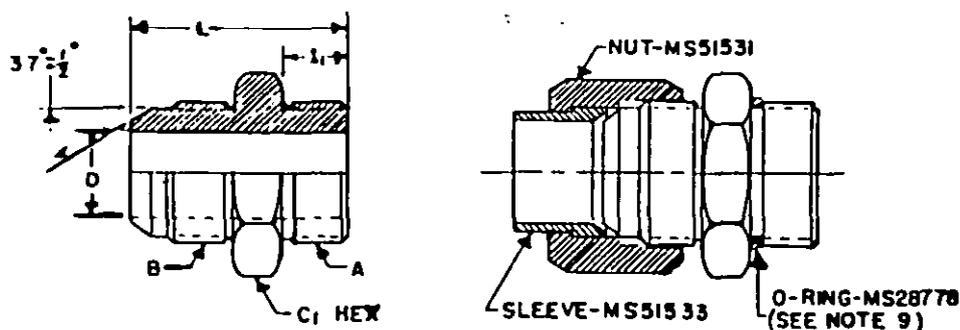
Adapter, Tube to Boss, O-Ring, Flared.
